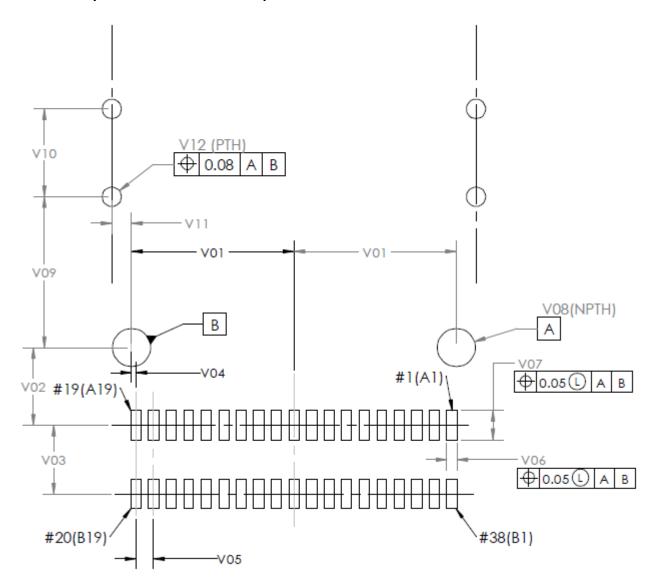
4X RIGHT ANGLE RECEPTACLE CONNECTOR FOOTPRINT
